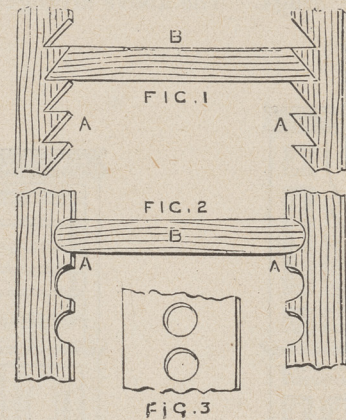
Old style. A, A, Uprights; B, Bearer. Fig. 2.—Improved mode. A, A, Uprights; B, Bearer. Fig. 3.—Mode of preparing uprights.
